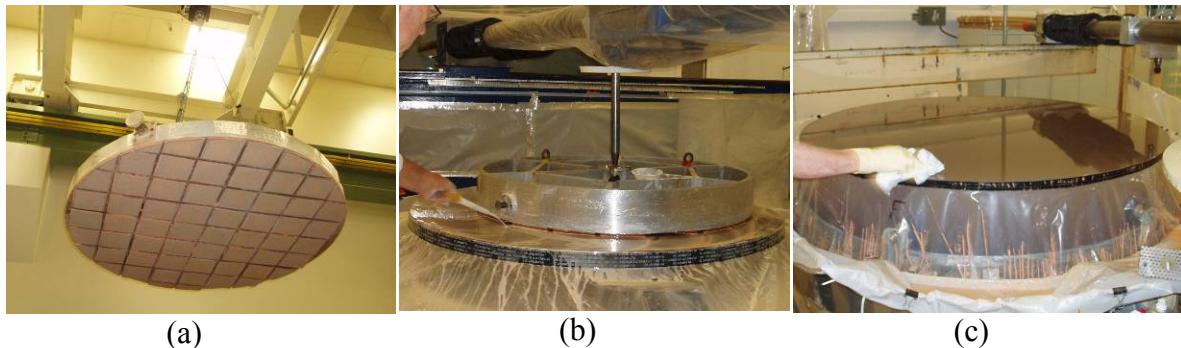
(a) Large (100 cm) tool with square tiles in pitch used for grinding. (b) Grinding/polishing with the large tool. (c) 1.6 m flat mirror polished to a smooth finish with a large tool.
